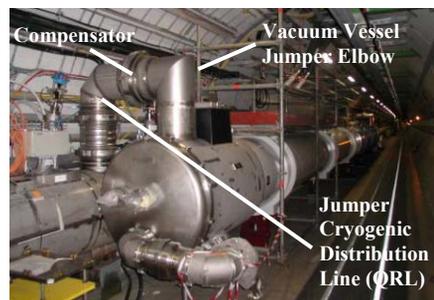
Vacuum Vessel Jumper Elbow welded to the compensator of the QRL.
